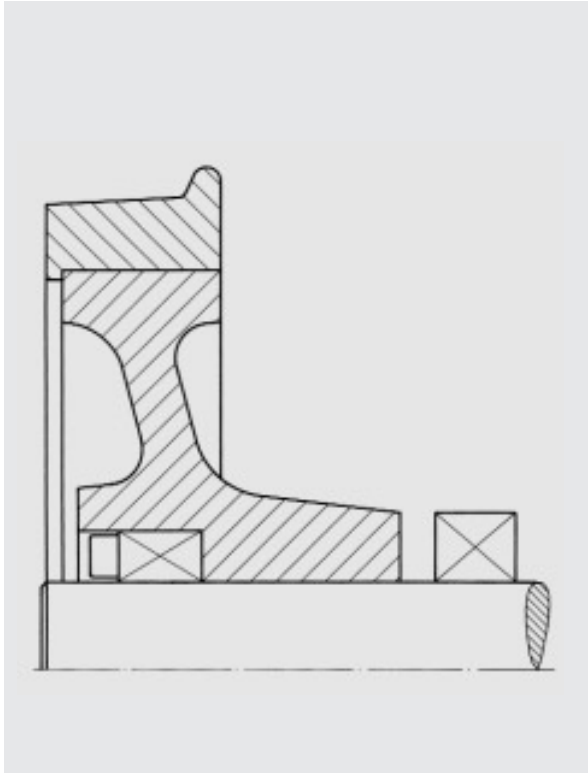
· Track wheel mounted using one Locking Assembly RfN 7012. The Locking Assembly must transmit above all the torque. The minor bore of the hub should be as long as possible and have close clearances in order to improve true running and to absorb stresses resulting from the axial force acting off-centre on the rim.
